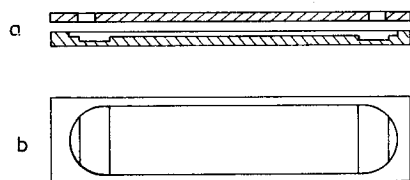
(a) Side view of top and lower part of the rectangular capillary; (b) Top view of the lower part of the rectangular capillary.
